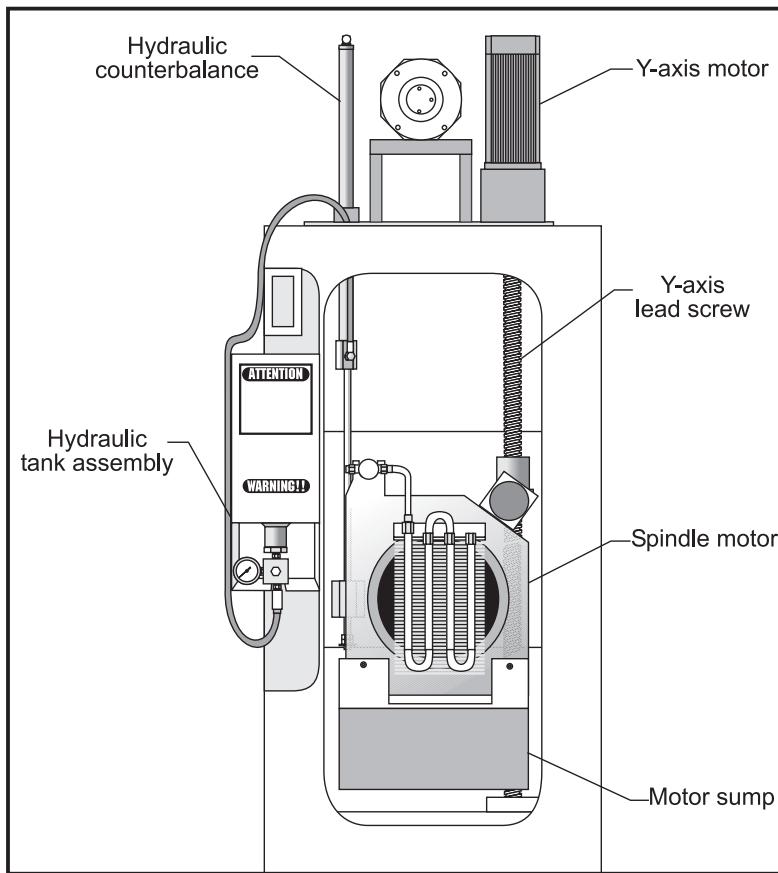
Y-axis lead screw and motor assembly (from rear).
